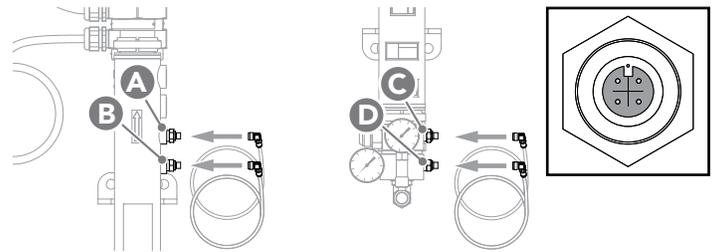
Tank assembly showing coolant high-limit RTD (A), oil high-limit RTD (B), coolant control RTD (C), and oil control RTD (D). Note RTD notch position (inset).
